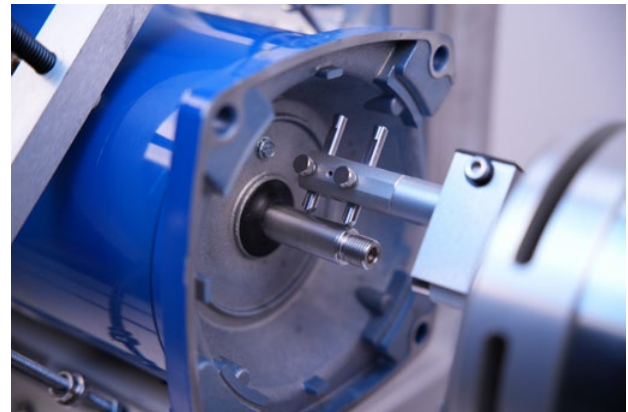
Measuring alignment of a motor with an extended flange. The ATK can be used in tightly constrained spaces.
